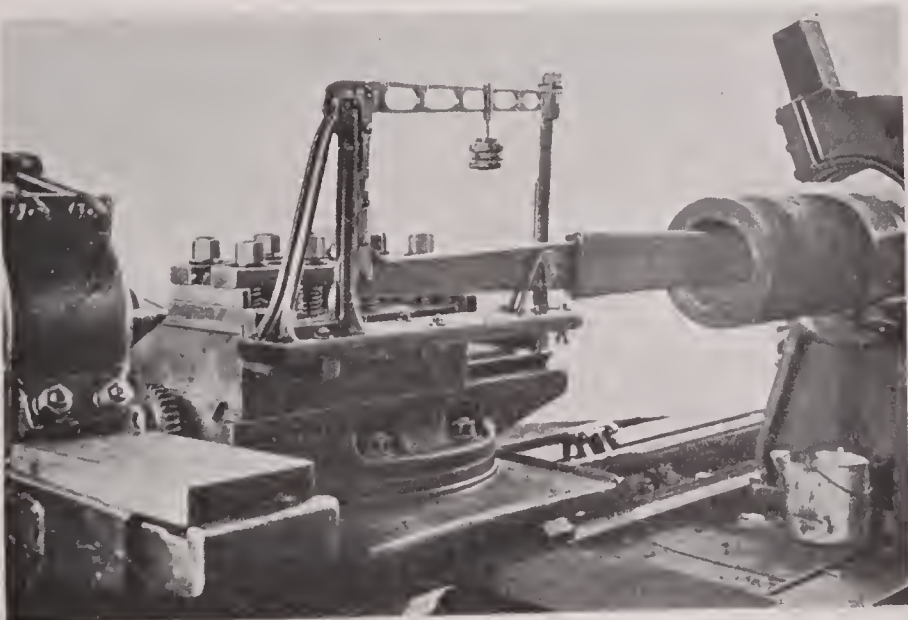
INDICATOR MOUNTED ON TOOL CARRIAGE.
